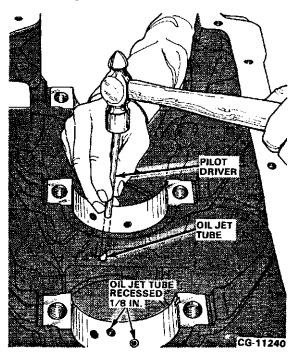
Piston Oil Jet Tube Removal/Installation
